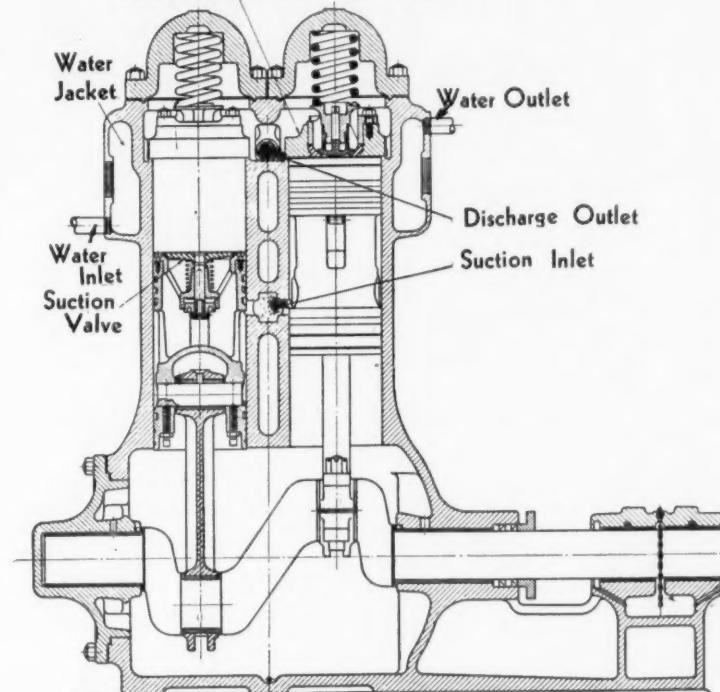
Sectional view of vertical twin-cylinder compressor showing safety head and discharge valve. This machine uses trunk-type pistons with single suction valves. The compressor is manufactured by Carbondale Machine Co.
